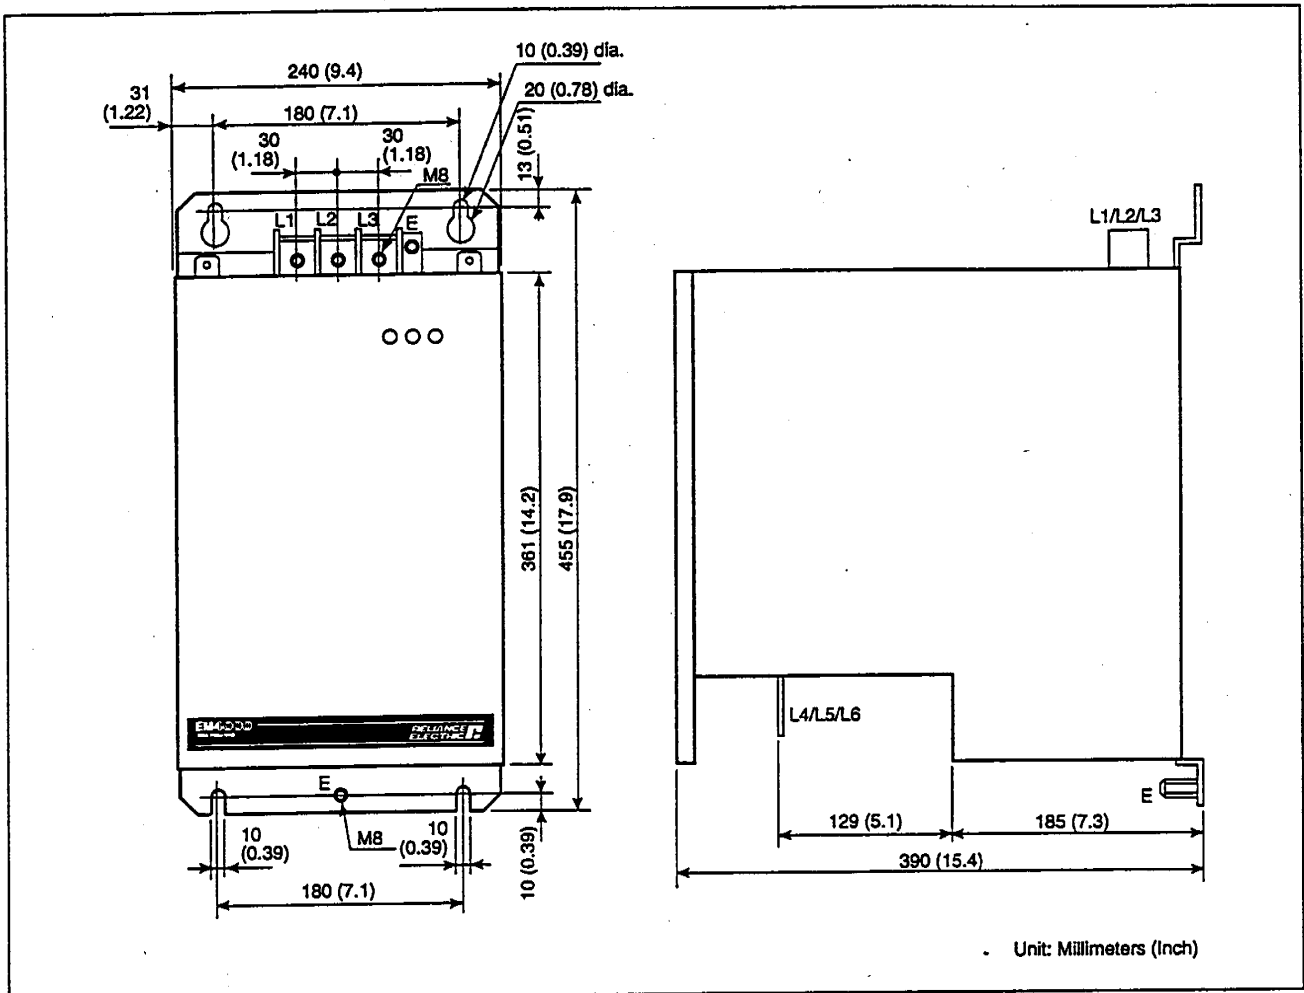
Dimensional Outline Drawing of Model EM441B and EM4265 EMC Filter Units
